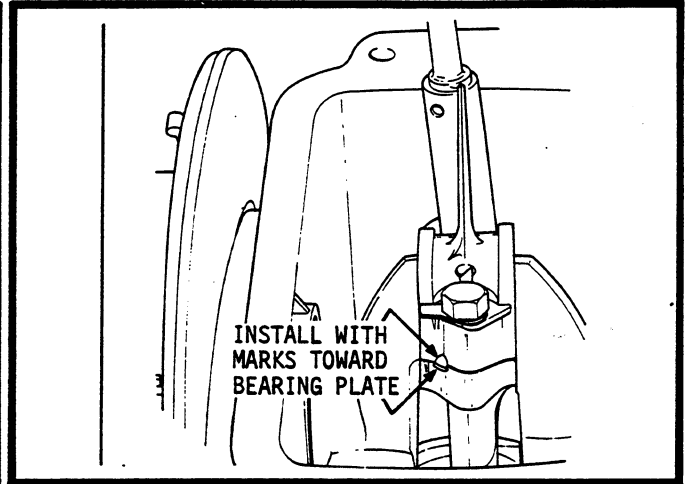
MATCH MARKS ON CONNECTING ROD AND CAP
